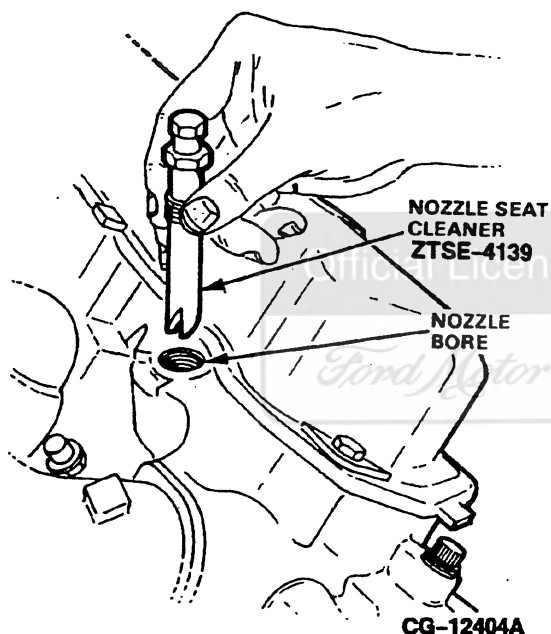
Cleaning Nozzle Seats with ZTSE-4139
